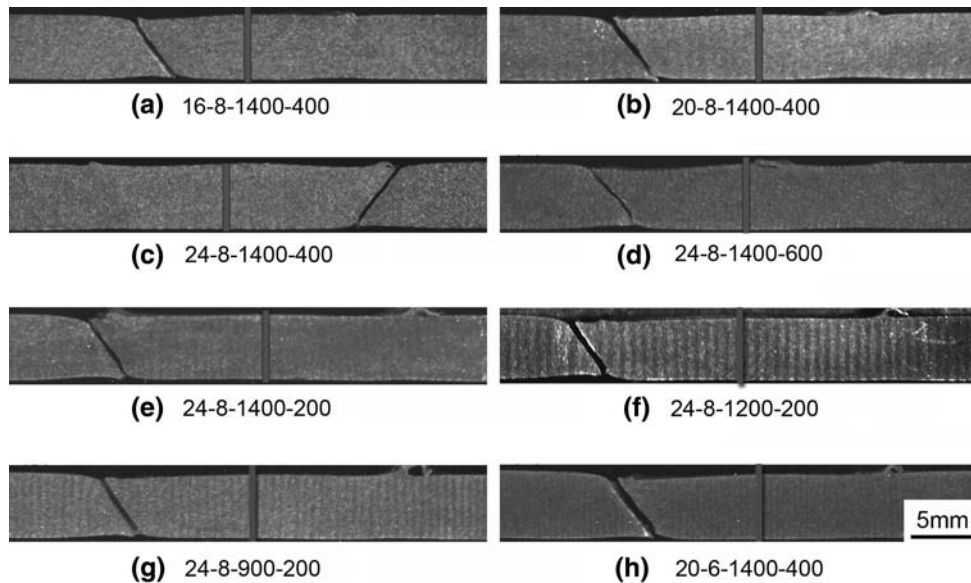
Appearance of failed FSW 6061Al-T651 joints.
